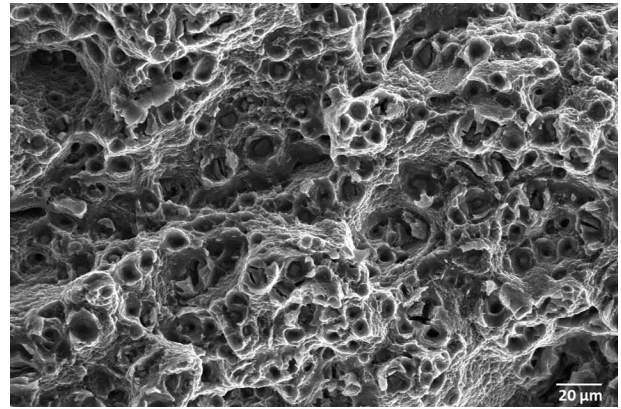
Higher magnified image of the fracture surface shown in Fig. 42. Note equiaxed dimples indicating ductile failure
